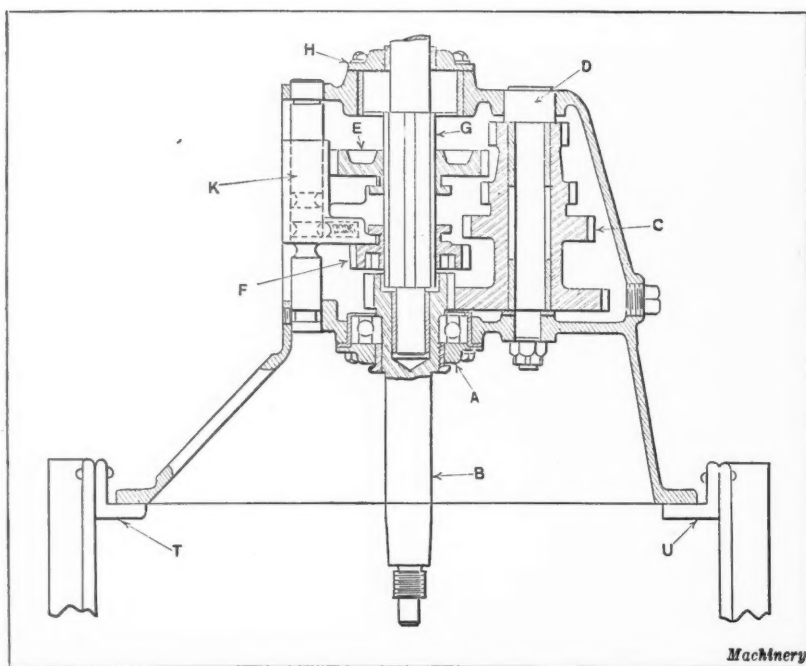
Sectional View of Transmission Case assembled by the Conveyor Method
